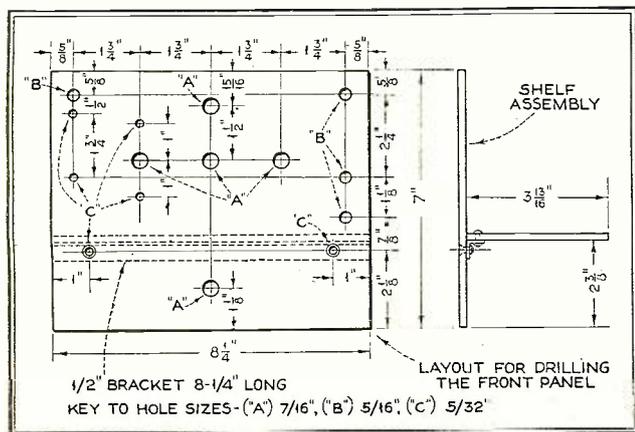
For drilling the main panel and mounting the shelf to its back, the drilling and assembly details given above should be followed carefully
